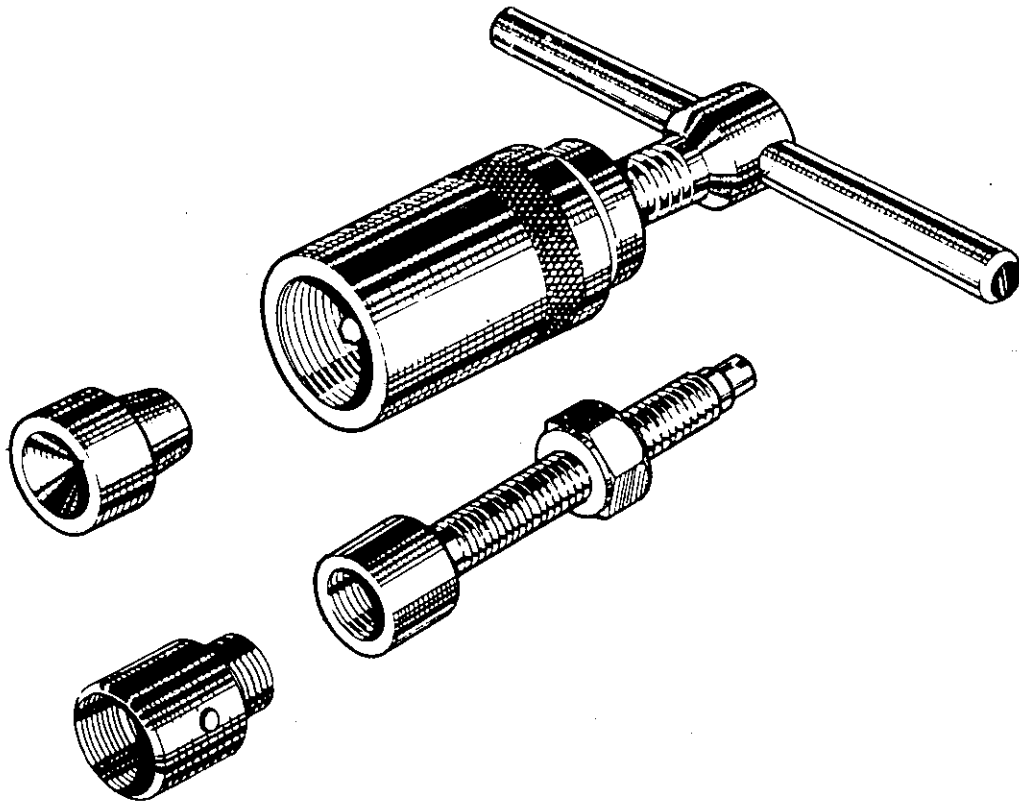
Camshaft pinion extractor and replacer No. 60-2213.
